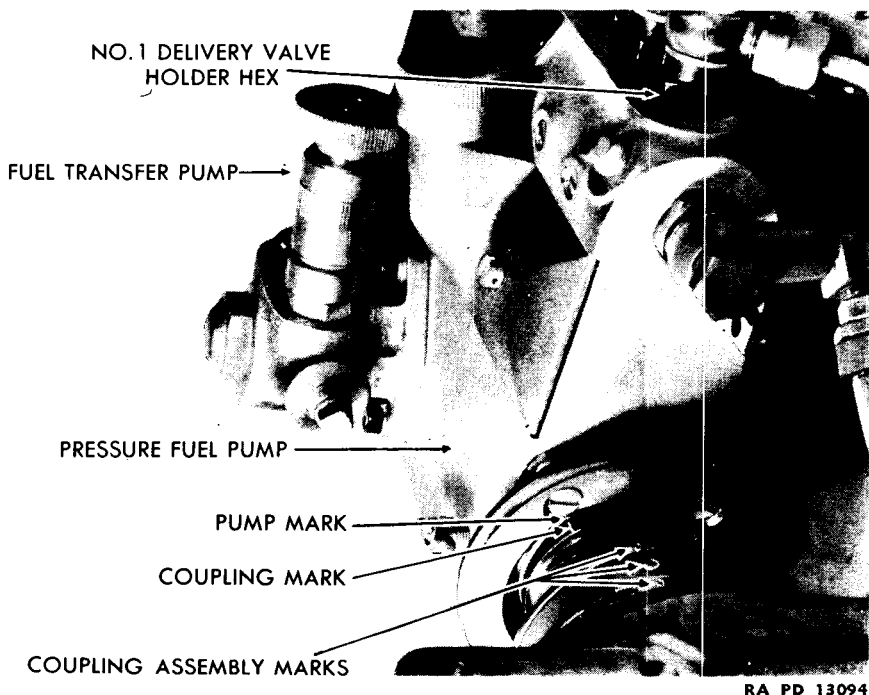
Fuel Pump Coupling Marking - (Buda Diesel)
